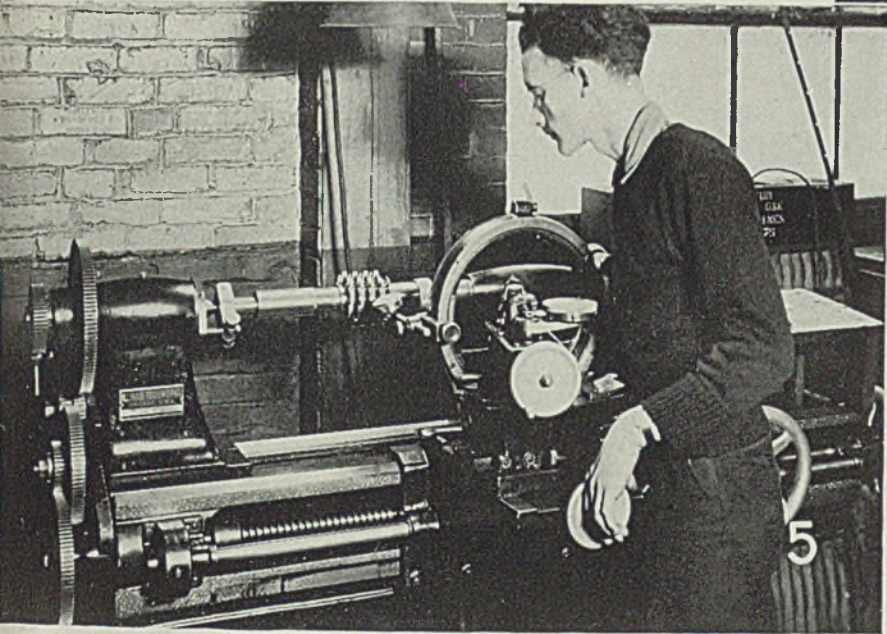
All new hobs are checked to predetermined tolerances before use. A hob is mounted on an arbor located between centers of this machine. A master index plate for the required number of gashes insures proper indexing for gash spacing. A dial indicator finger checks deviation from correct gash-to-gash spacing and for deviation from a true radial cutting surface, both of which must be within 0.001-inch. Tolerance for cumulative gash-to-gash spacing is 0.003-inch. Lead, profile and eccentricity of cutting edges of 6 pitch and finer is 0.00025-inch for tooth-to-tooth lead spacing and 0.0001-inch cumulative tolerance end to end. Tooth profile tolerance is 0.0002-inch and outside diameter must be held within 0.0003-inch. Hub eccentricity and runout of hub face are checked to a tolerance of 0.0005-inch; bore tolerance is 0.0002-inch
